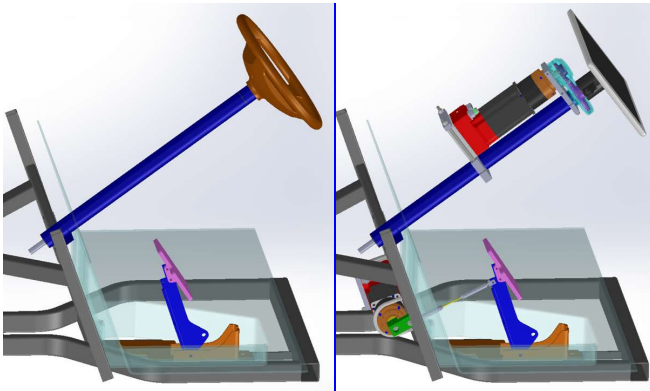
Computer Aided Design (CAD) of steering and braking motor actuation. Stock configuration (left) and configuration retrofitted with motors for drive-by-wire controls (right). The steering wheel was removed and replaced with a touchscreen.
